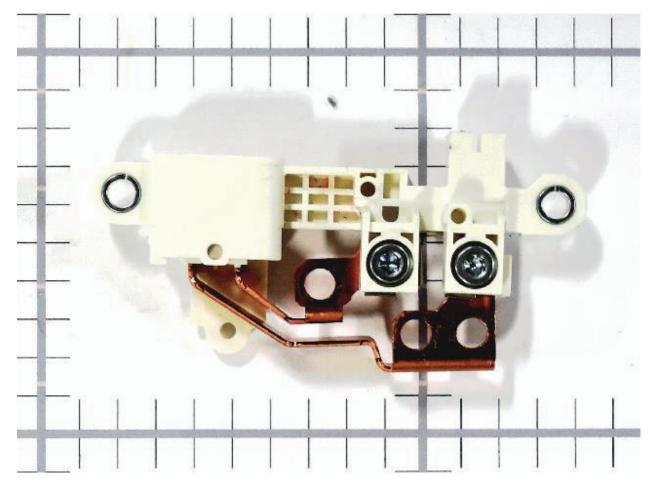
Toyota Inverter: Receptacle Cover Assembly
